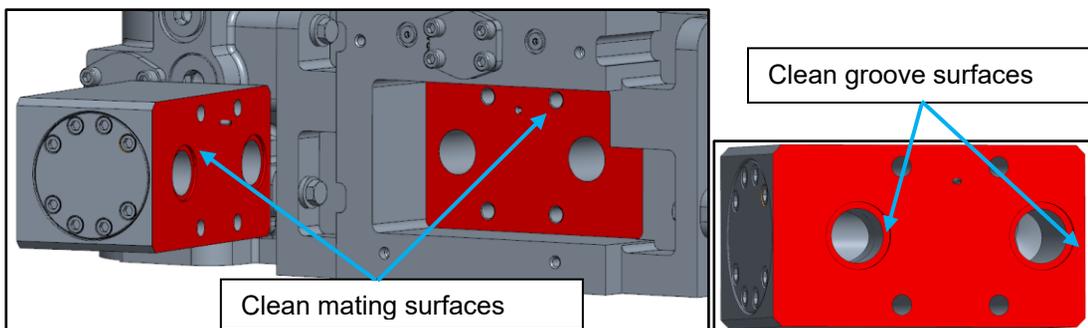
Shuttle Valve and VS-DX Mating Surfaces Cleaning
